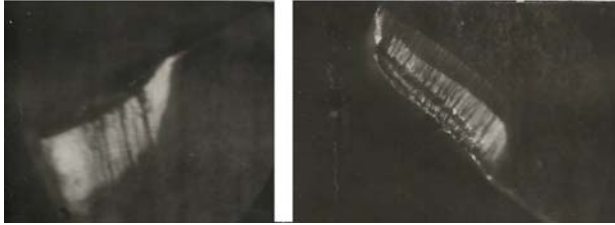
Photography of tool wear on the face and back after 200 minutes of tool work. Major flank and face
